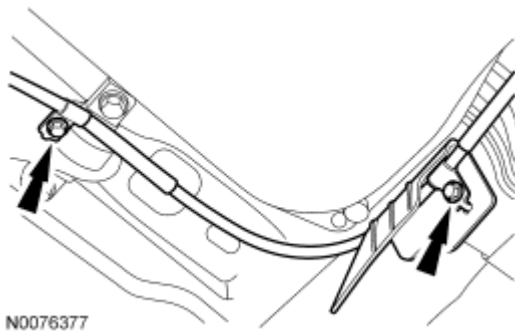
Locating Bolts On LH Rear Parking Brake Cable Assembly Aside
